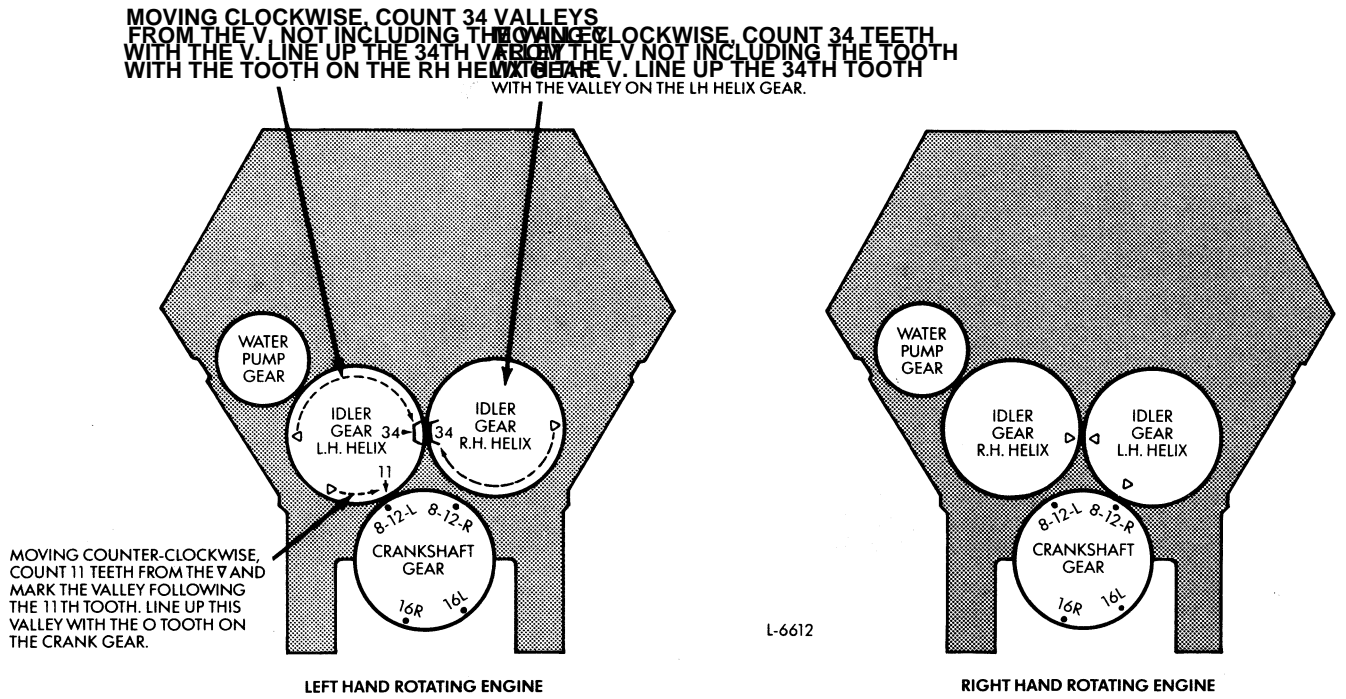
Front Gear Train Timing Marks - 8V-149 Engine
